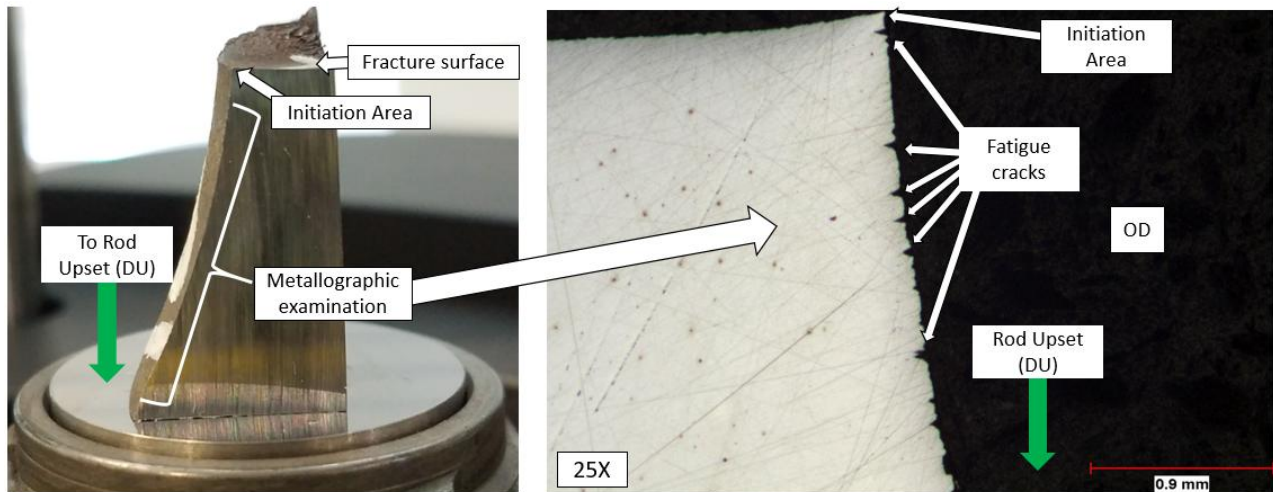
Optical Microscopy images at 25x, of a longitudinal section through the fracture surface.
